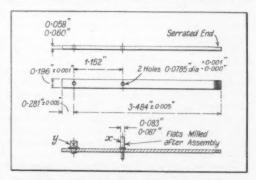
Typical Example of a Key Stem Riveted on the Townsend Machine
